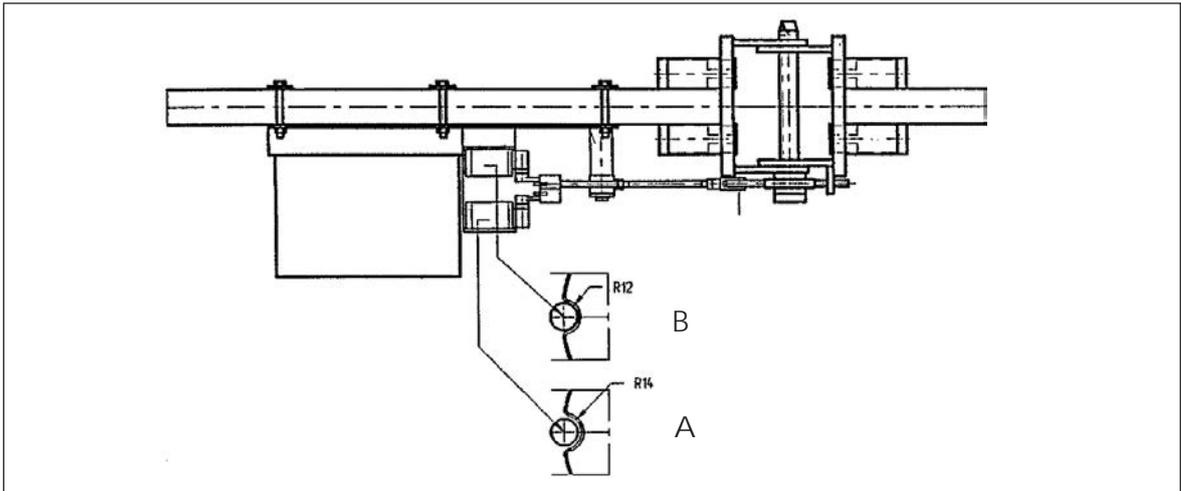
Assembly of the hinge-halves to middle the platform.
